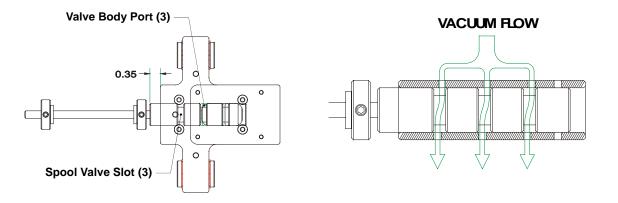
Feeder vacuum valve assembly illustrating the location of the spool assembly when the shuttle feed plate has attained its fully back position. Side view shows vacuum flow from the top to the lower valve body port when spool valve slots are properly centered along the ports. End port shown is the vent port which is completely blocked by the spool.
